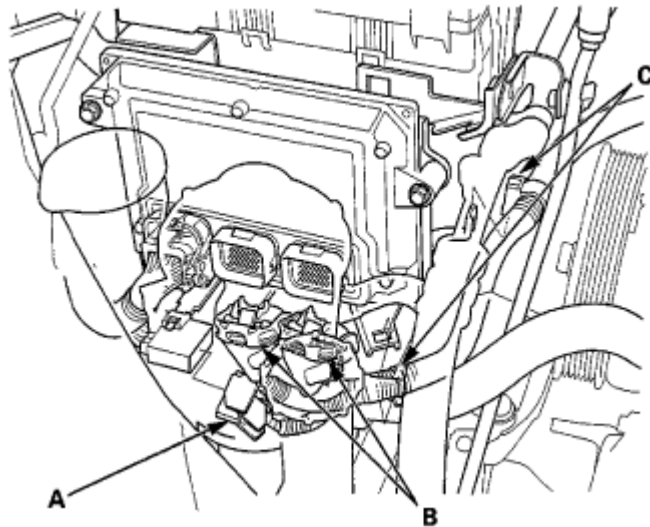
Identifying Engine Wire Harness Connector, PCM Connectors And Harness Clamps
